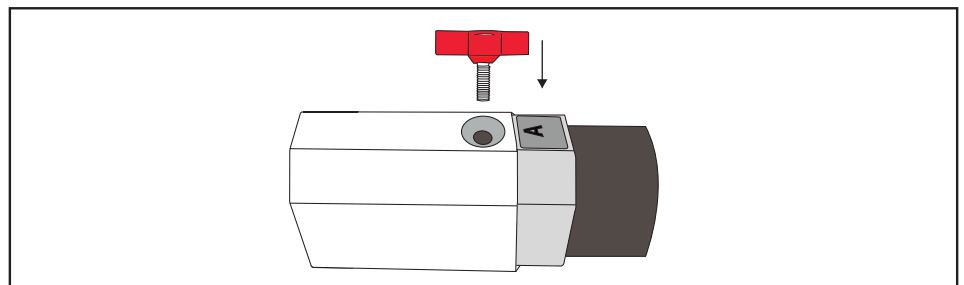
Screw Long Red Arm Screw into Top Boom Arm Connector
